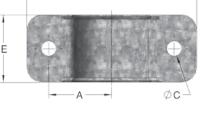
WEIGHT (LBS) • DIMENSIONS (IN)
